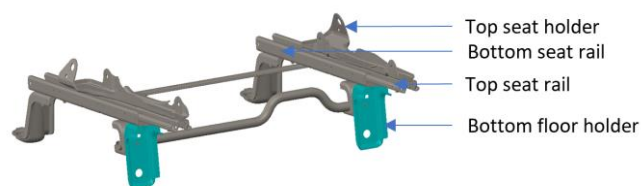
Extracted seat rail assembly from the complete seat assembly⁴
